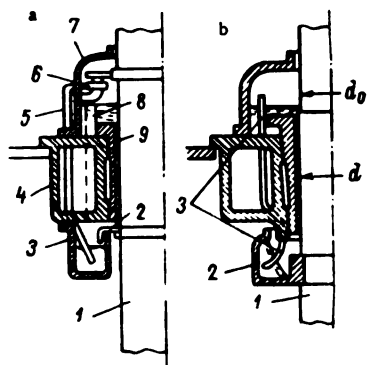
Oil-lubricated turbine guide bearings
